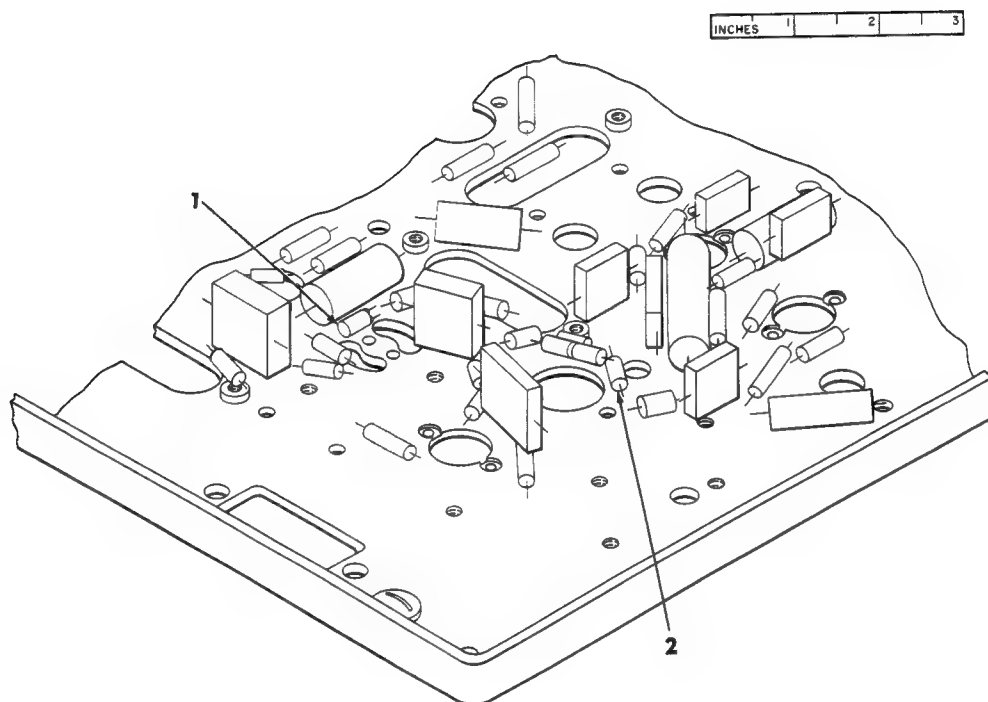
Coder, radar, guided missile (8159349)—partial exploded view
